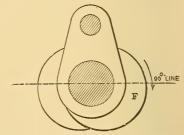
Single Eccentric, Lapless Valve, no rocker.
